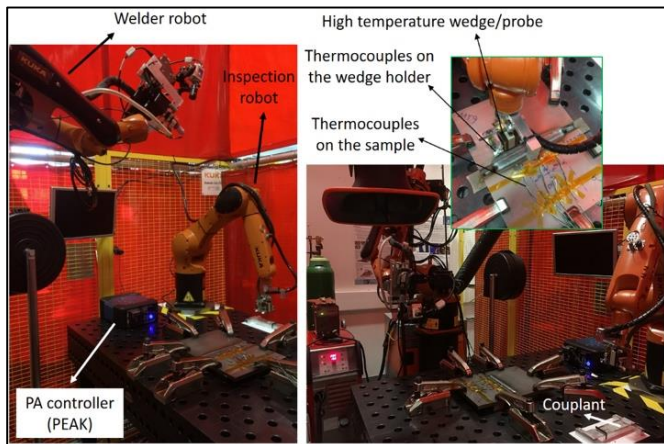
AUTOMATED MULTI-PASS WELDING AND INSPECTION SYSTEM
